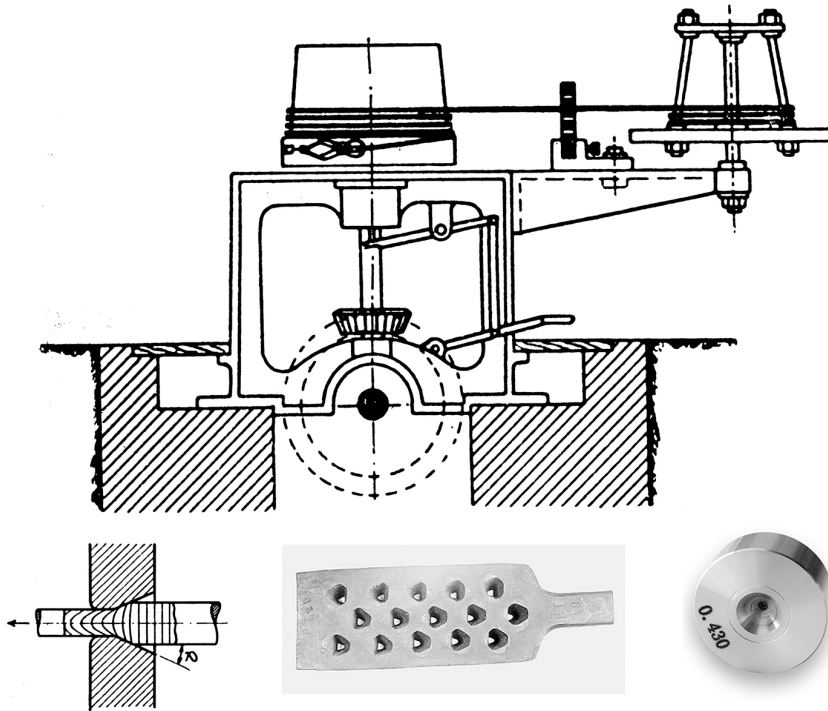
The coil, right, draws the cold wire through the draw plate. This not only reduces its thickness but also provides a better structure. The draw plate shown with 15 holes is atypical with its triangular holes. Most Danish nails were made using drawplate-stones from the 1950s.
